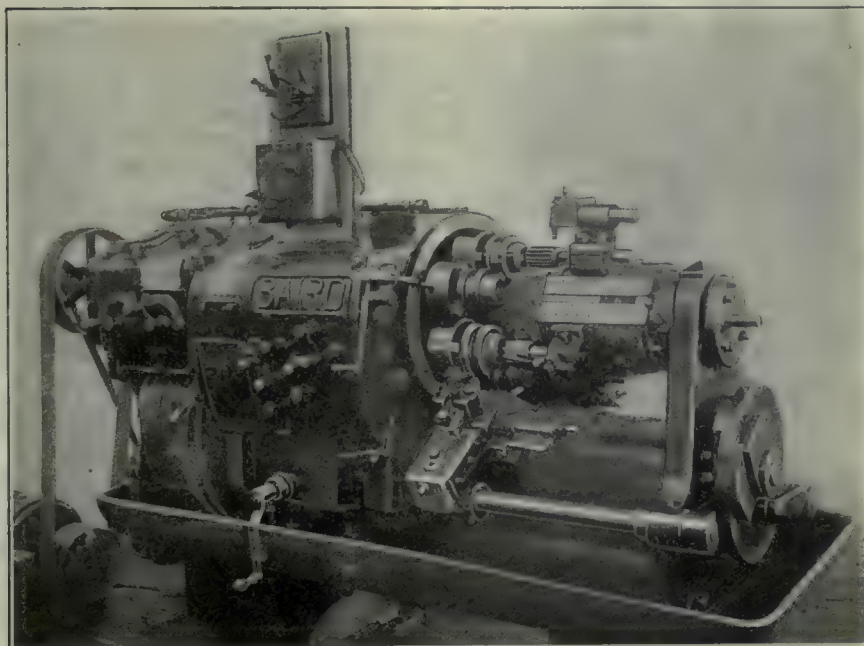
BAIRD SIX-SPINDLE CHUCKING MACHINE
